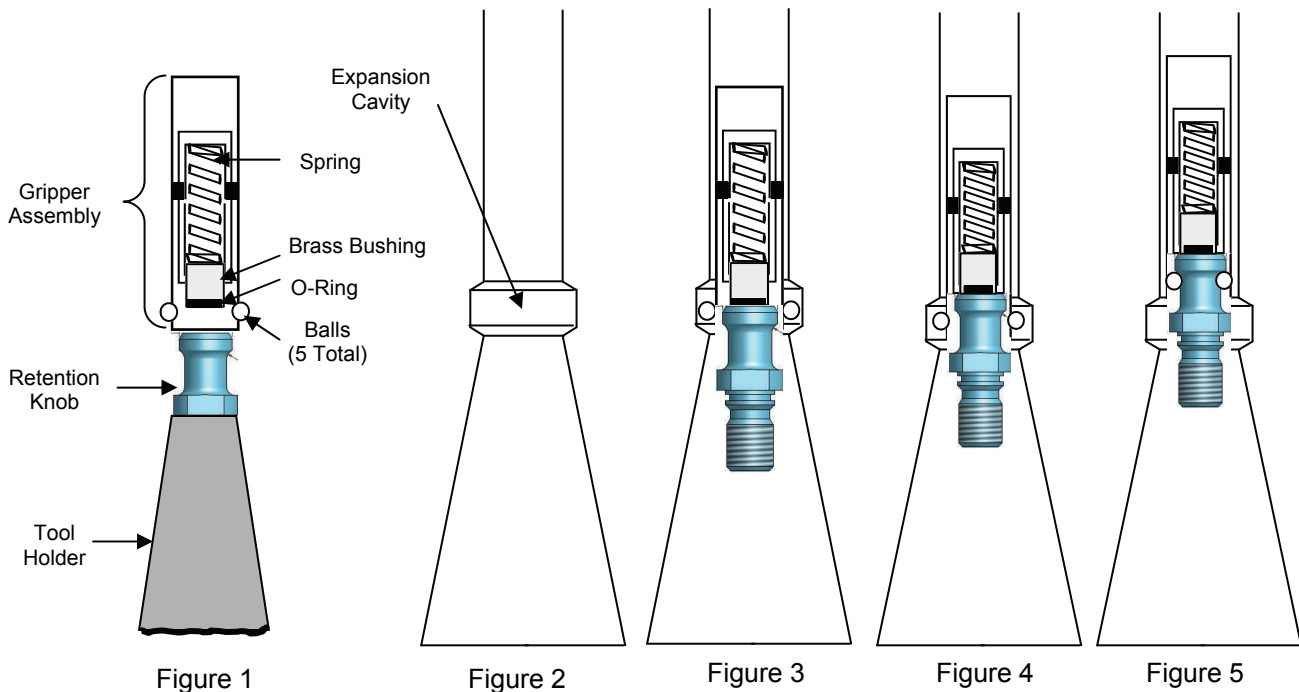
illustrates the gripper assembly's basic parts. The gripper is a tube about one inch in diameter. The brass bushing/O-ring assembly is free to move inside the tube, but is pinned in a way that it does not fall out. The spring pushes the bushing and O-ring downward.
